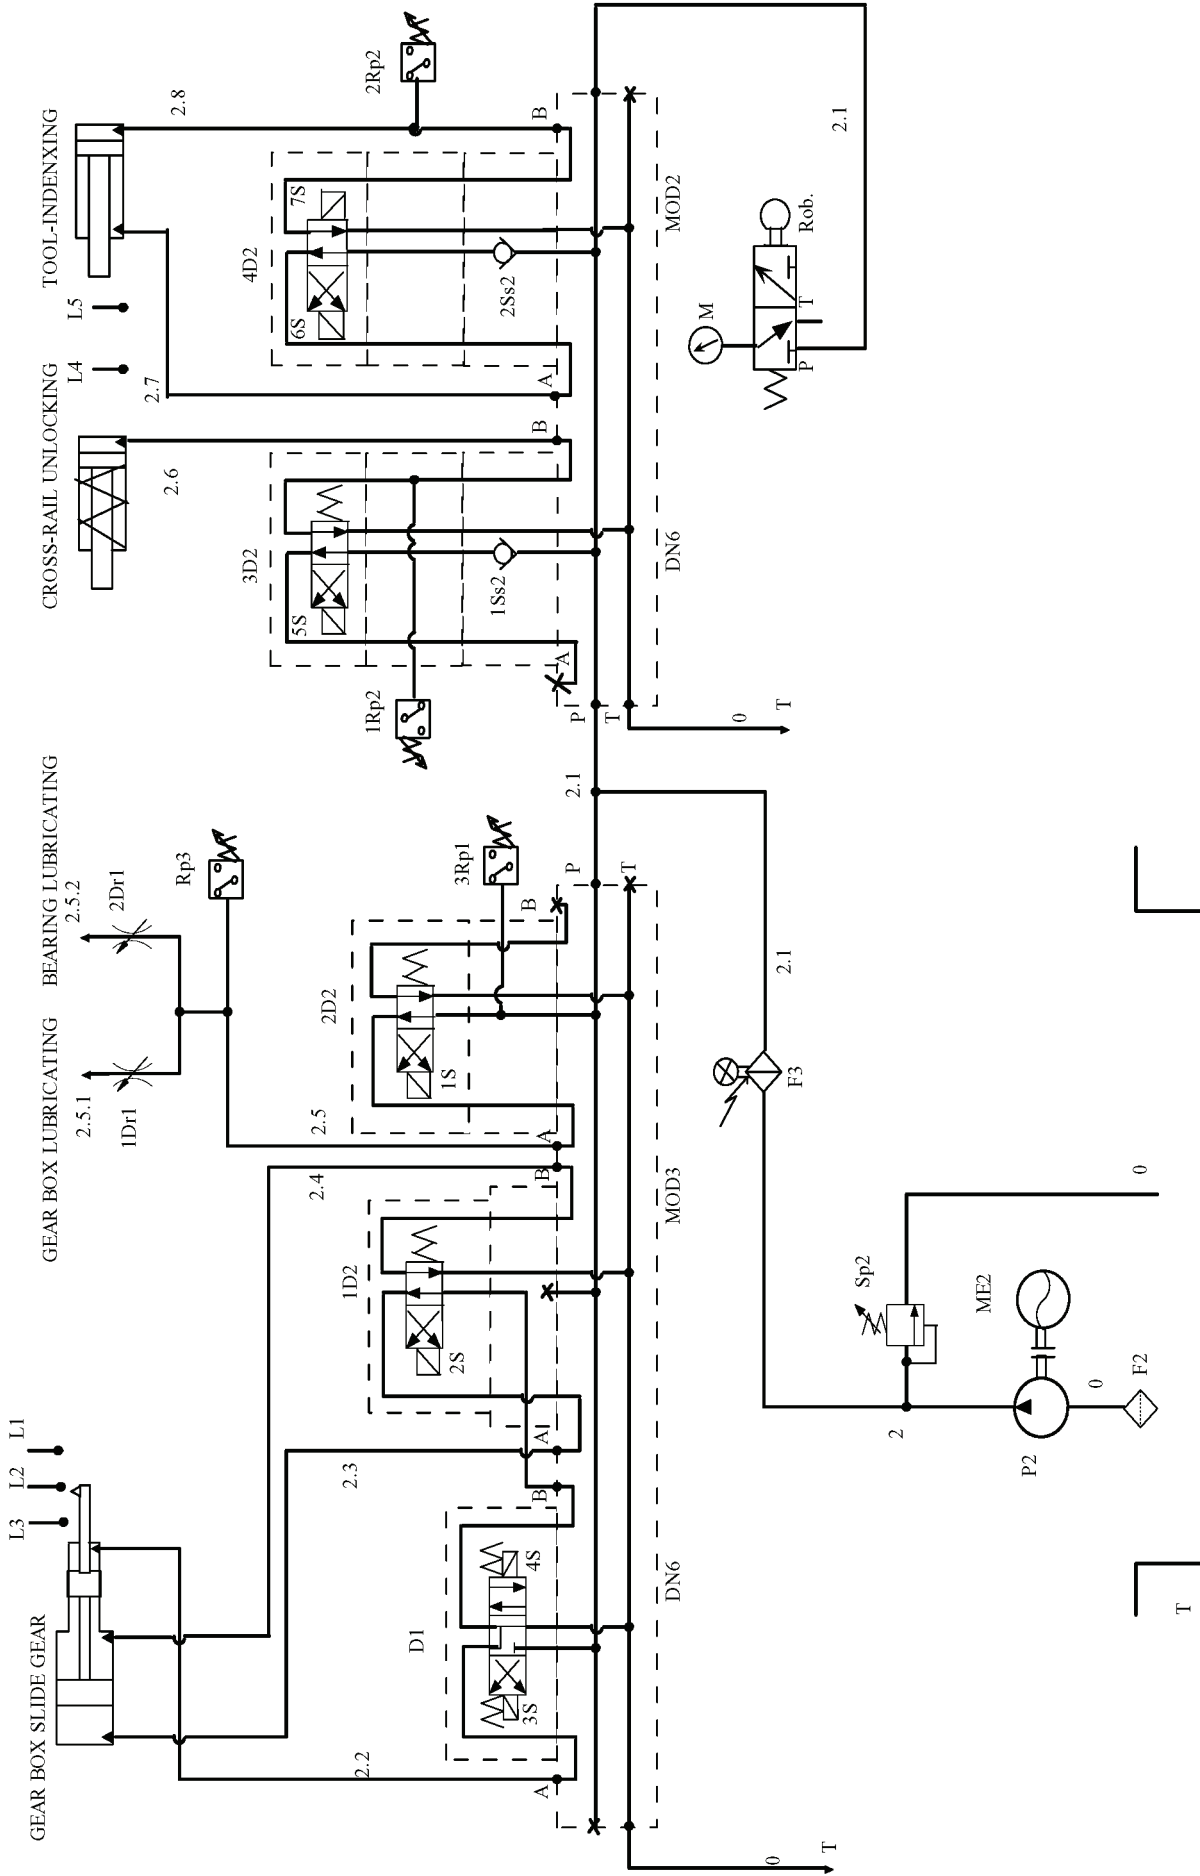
The hydraulic system pump-module with apparatus from the machine tool.
